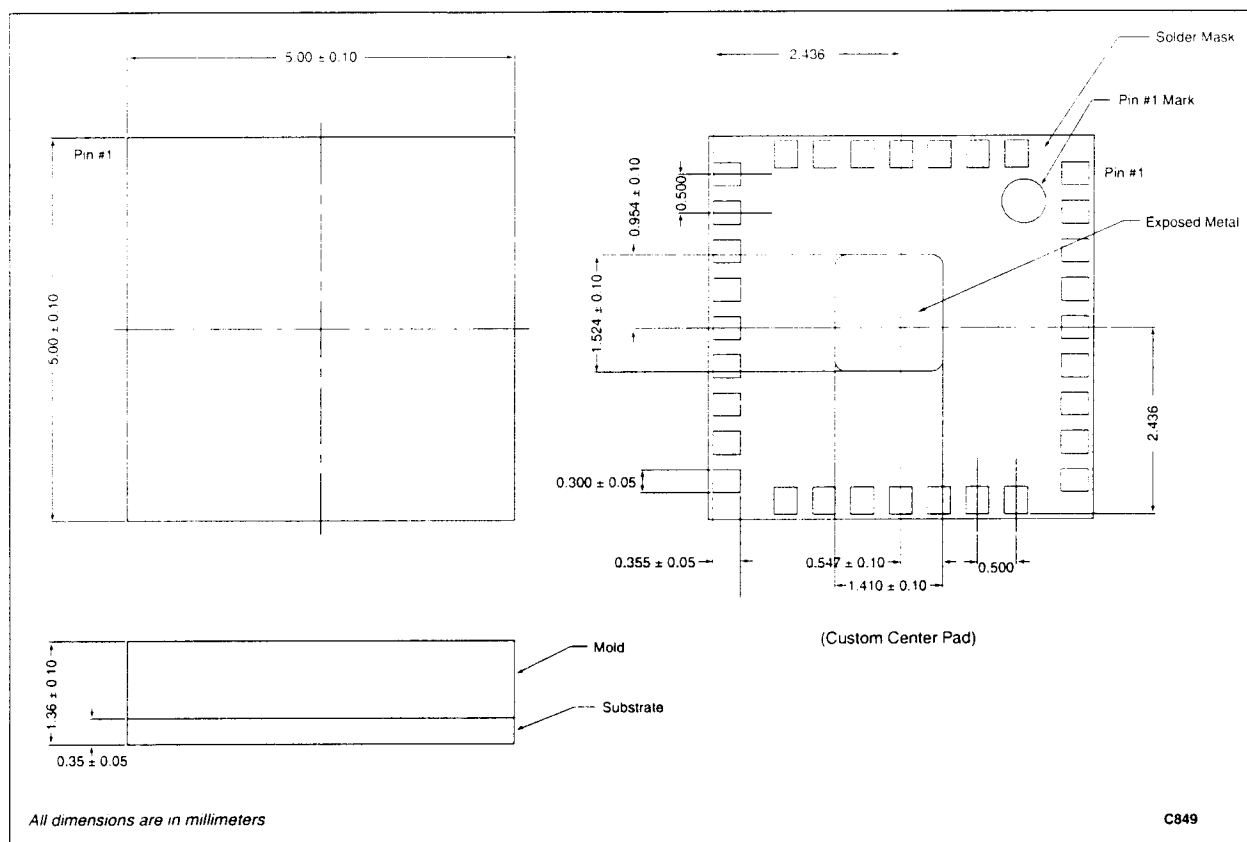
RF25H Tx ASIC Package Dimensions – 32-Pin LGA 5x5 Package
